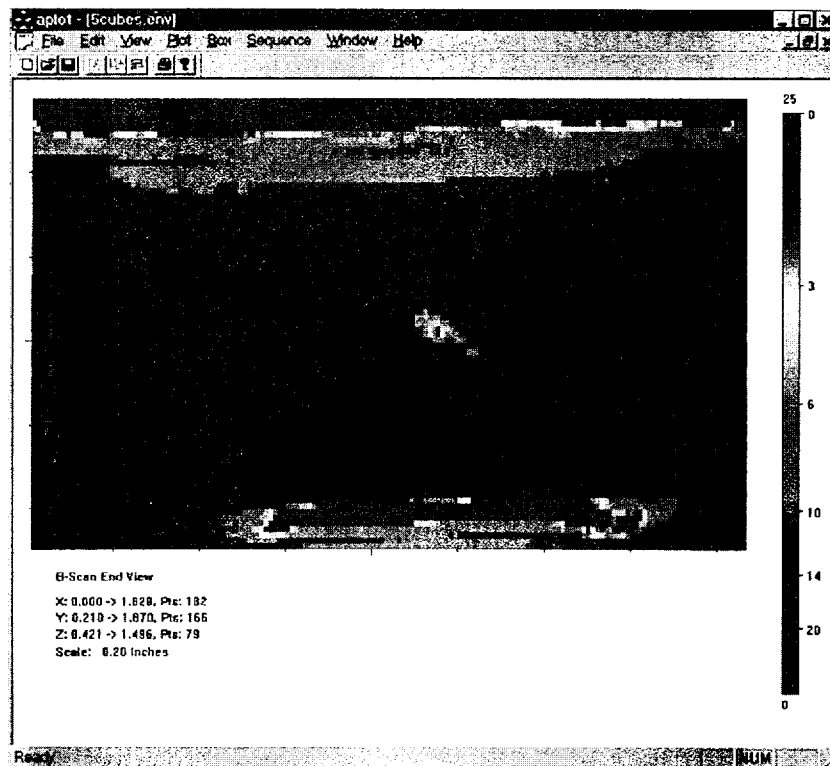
Ultrasonic Image of Flaw Indication in Near-Surface Zone Cube
